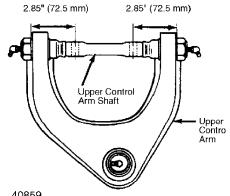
Positioning Upper Control Arm Shaft (Montero) Courtesy of Mitsubishi Motor Sales of America.
